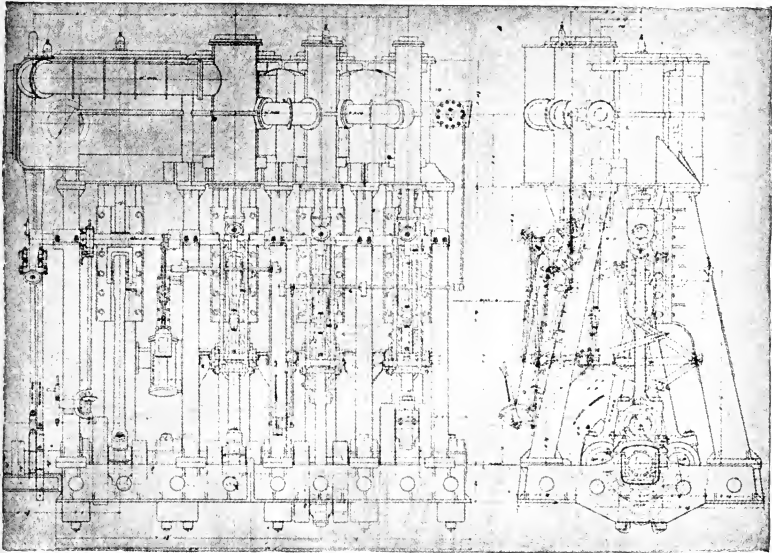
,113.—American Shipbuilding Company quadruple expansion engine. Cylinder, $18\frac{1}{2}$ — $28\frac{1}{2}$ — $43\frac{1}{2}$ — 66×42 stroke; 2,000 *i.h.p.* The *h.p.*, first and second *im.* cyls. are fitted with piston valves, driven by Joy valve gear, while the *l.p.* cyl. has a double ported slide valve fitted with shifting link motion, the arrangement making a short and compact engine, which is necessary on the Lake freighters where fore and aft space in the engine room must be a minimum.
